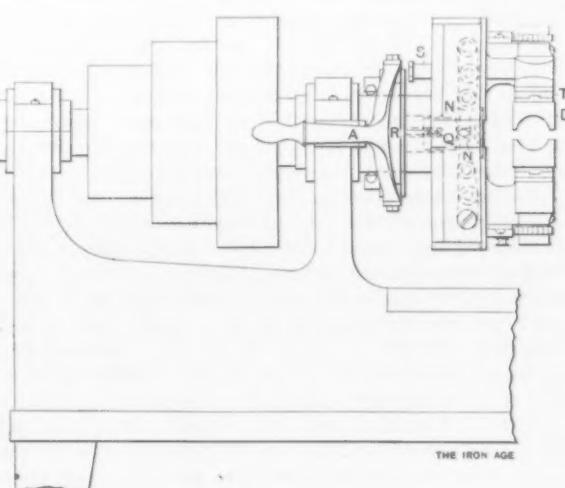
Detail of the Ess Ess Chuck Mechanism.
